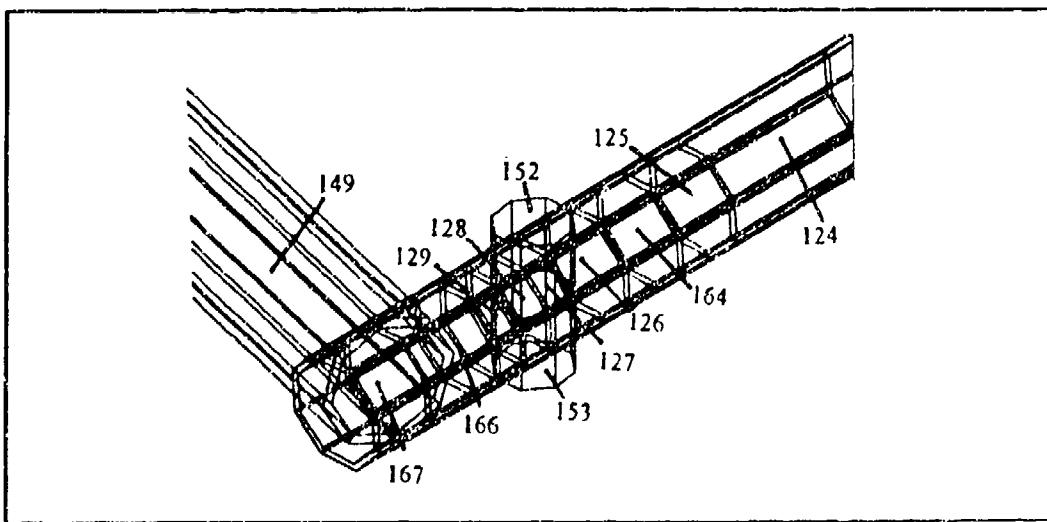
Attachment Point of Right Longitudinal Tube and Torque Tube
